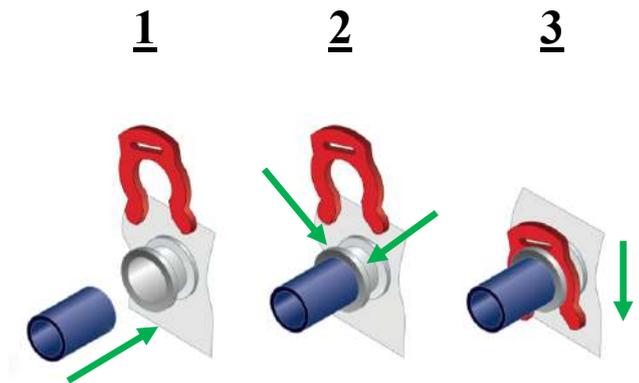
Connecting tubes and closing plugs to quick-release fittings on the Device casing.
